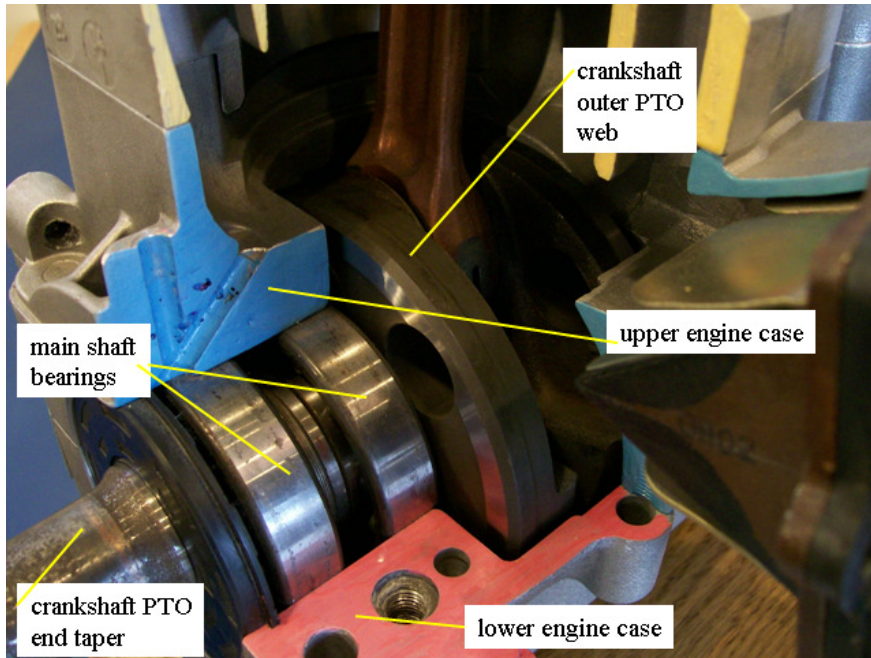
A close view of the section cut-away provided in Fig.2.1.1.
